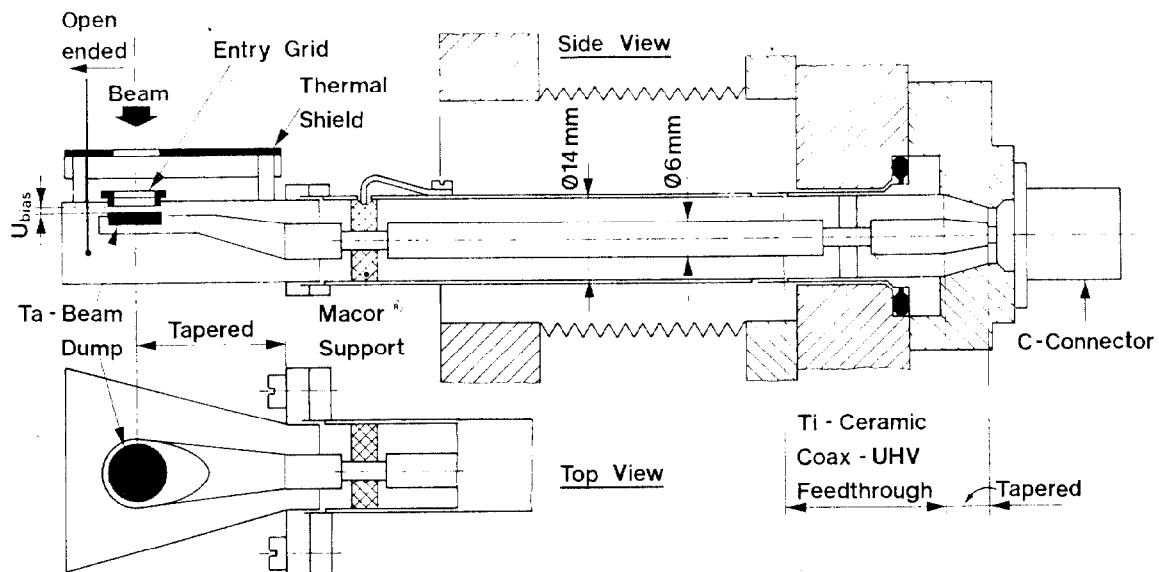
Cross section of the probe head, transmission line, vacuum feedthrough and output connector matching.
